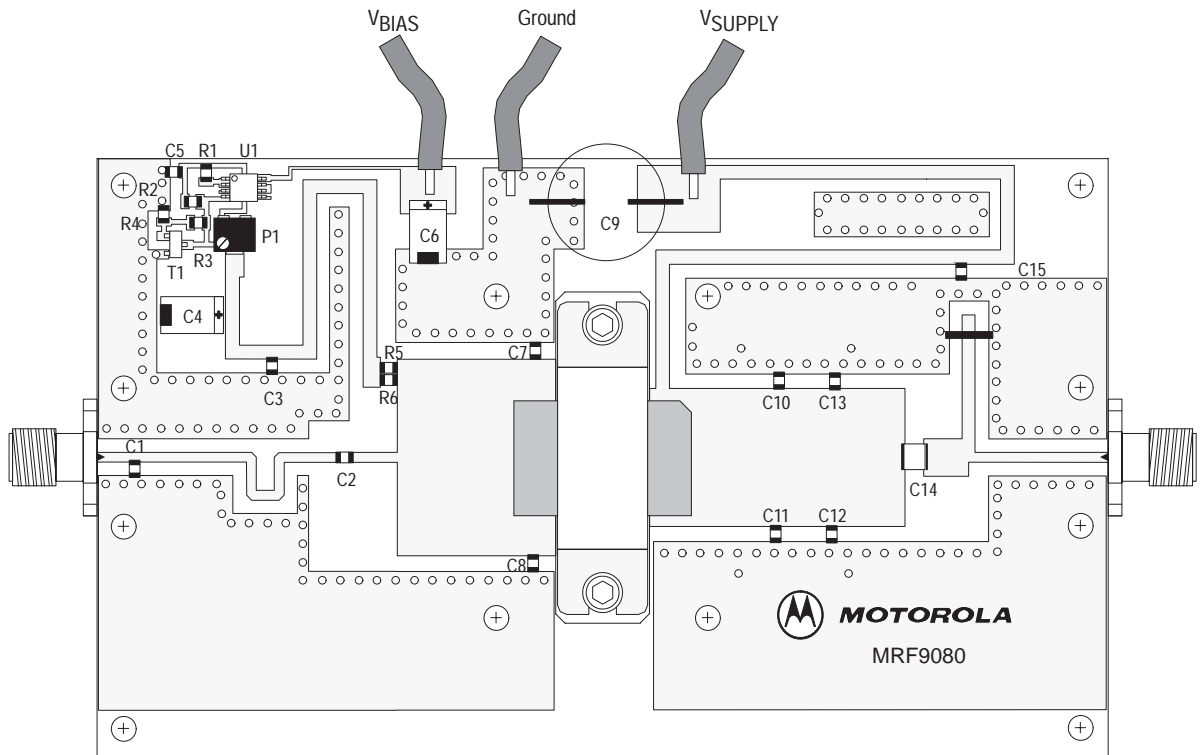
Broadband GSM 900 Optimized Demo Board Component Layout
